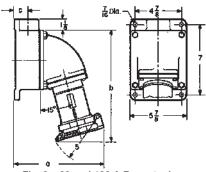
60 and 100 A Receptacle Assemblies
